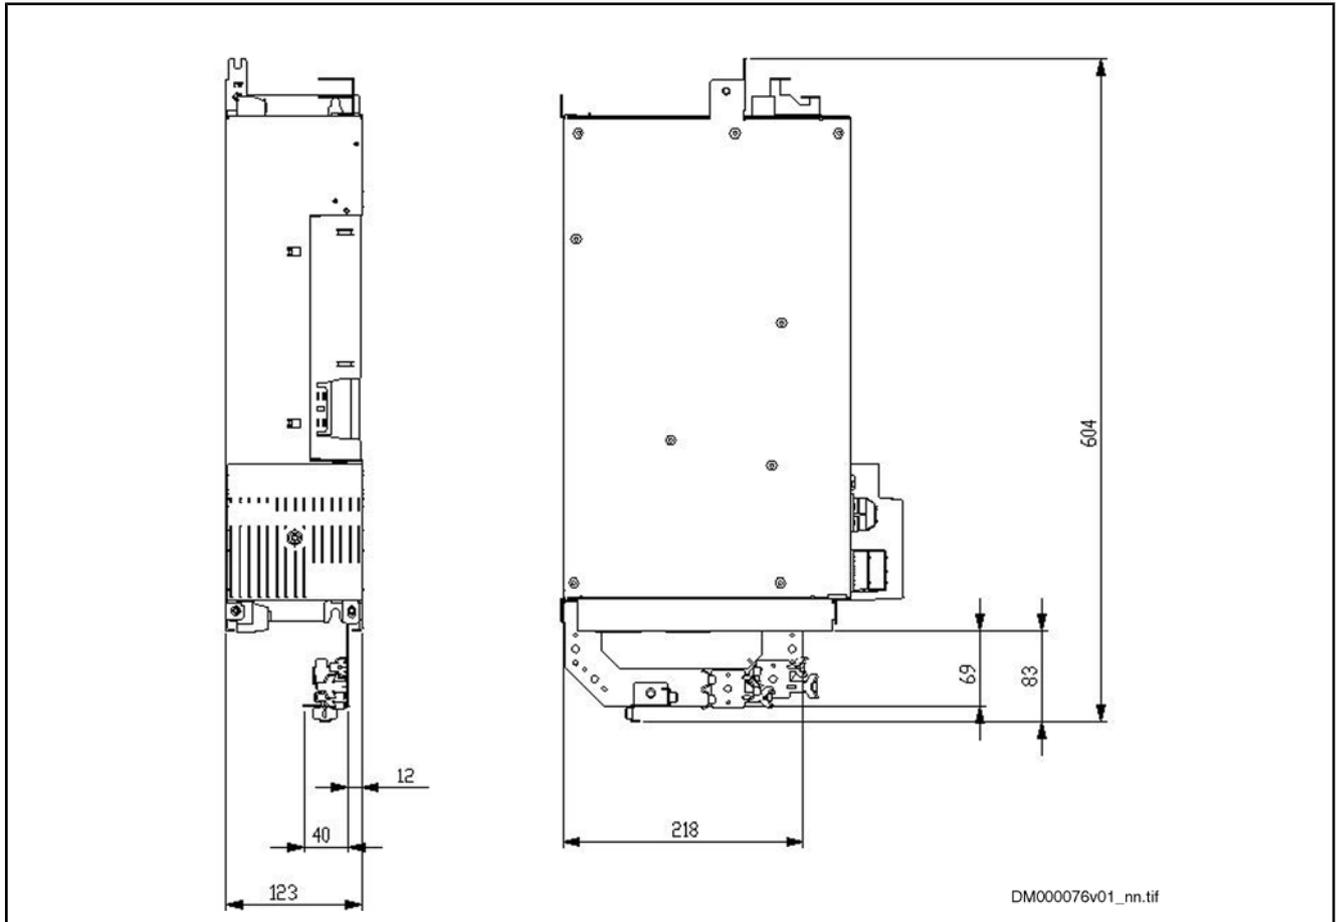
Dimensional drawing HCS03.1E-W0070 with HAS02
